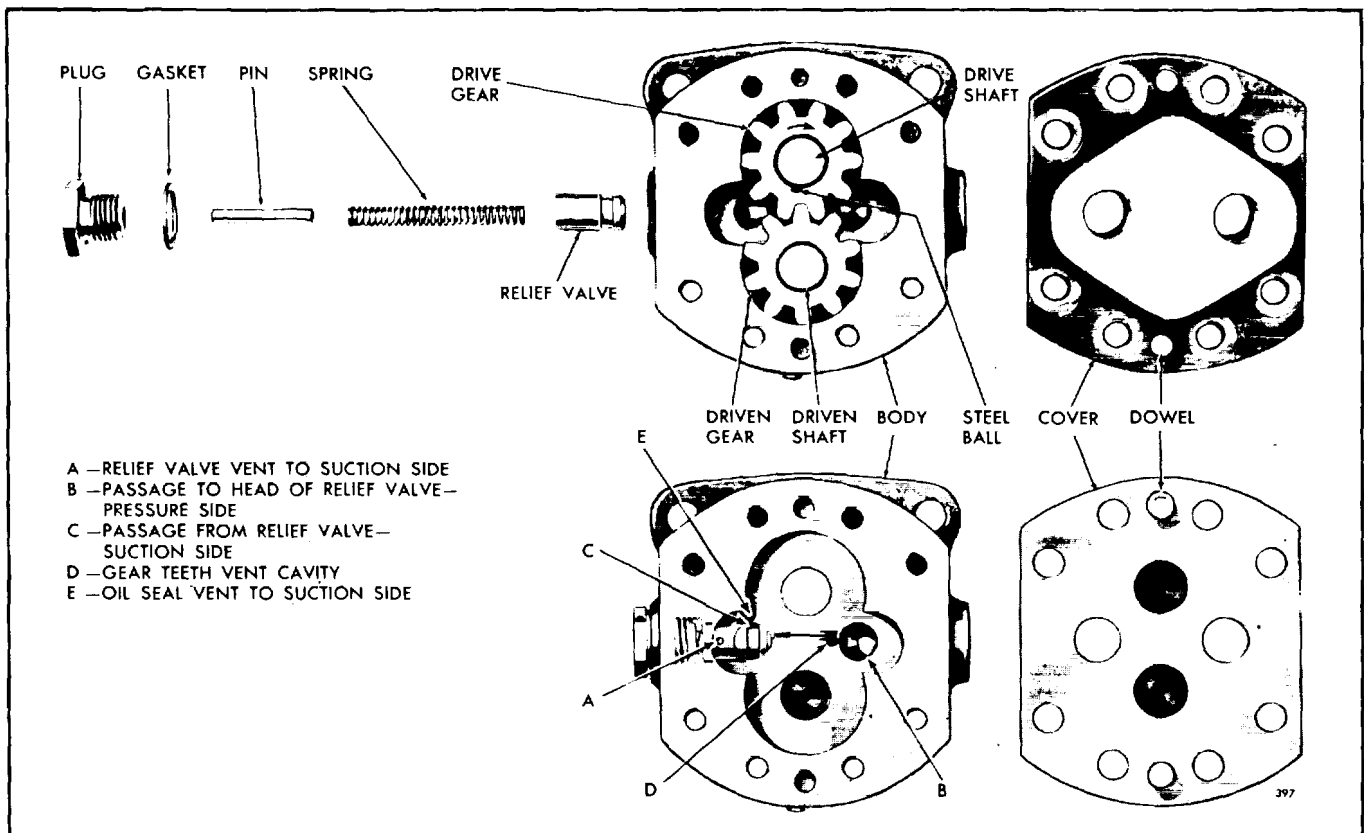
Fuel Pump Valving and Rotation (Right-Hand Pump)
